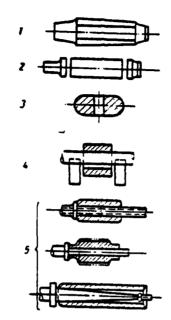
The diagram of forging on the press of the cylindrical shell of the bottle: 1 - ingot; 2 - removal/distance of riser and pan/pallet; 3 - sediment/residue; 4 - upsetting on the mount/mandrel; 5 - drawing on the mount/mandrel.
